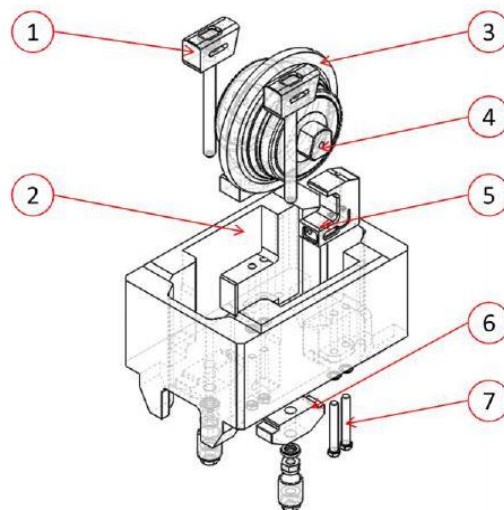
Wedge-Lock system 1) Clamping wedge with fastening screw, 2) Disc housing, 3) Cutting ring with roller base, 4) Disc Axis, 5) C-piece, 6) Clamping block, 7) Fastening
